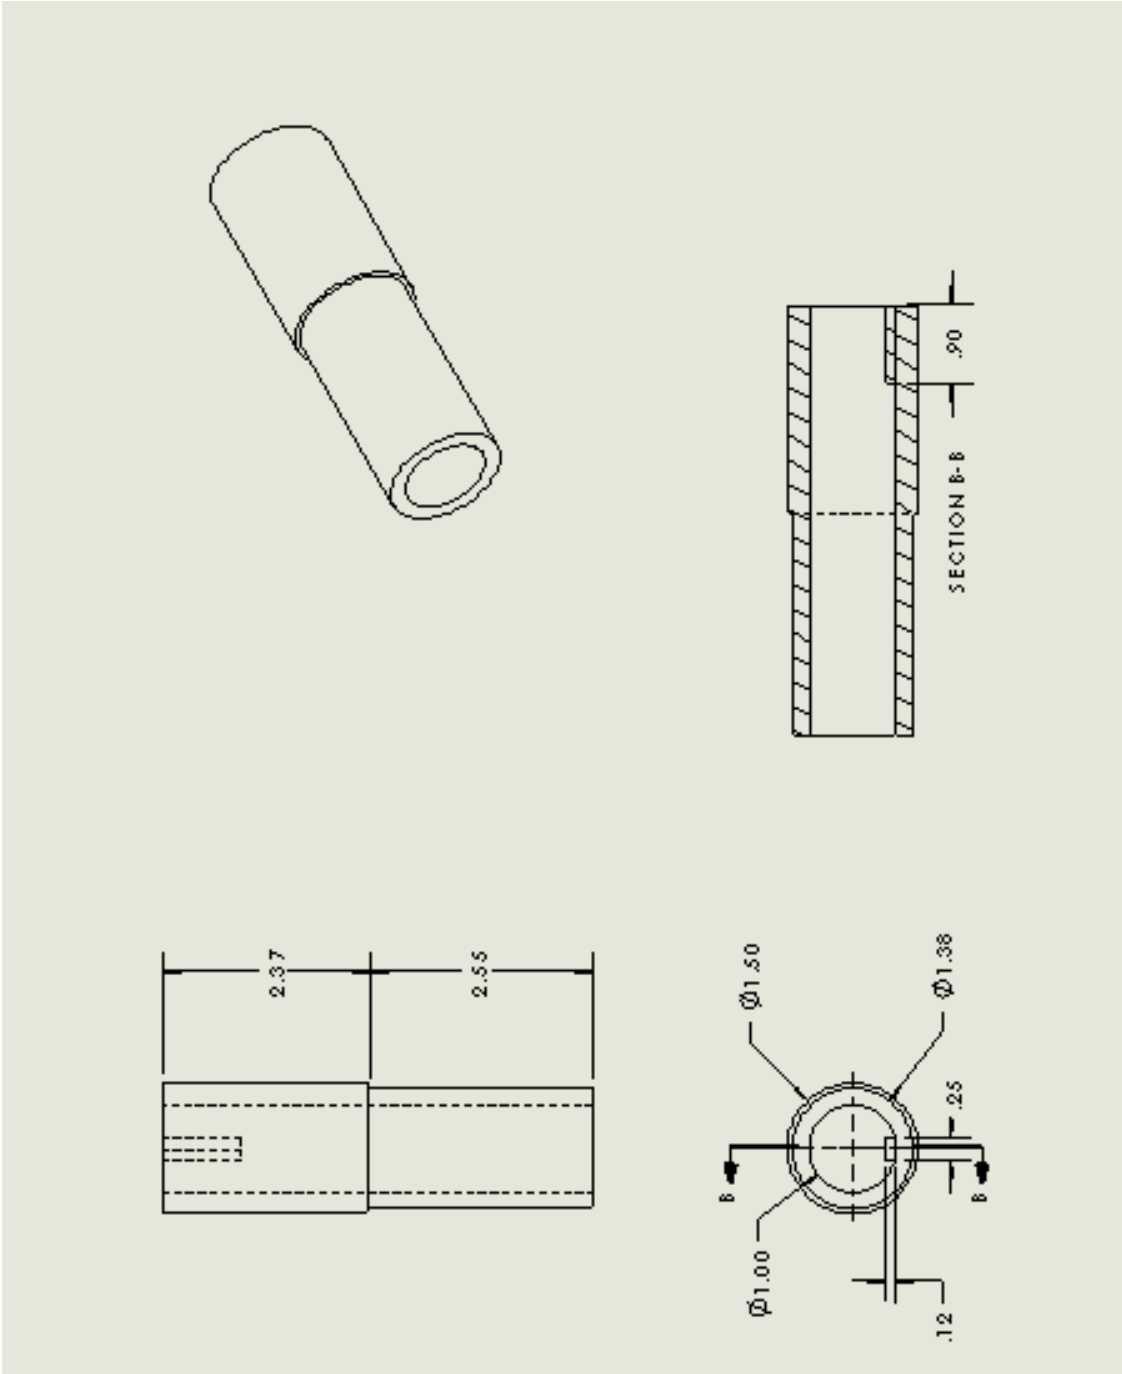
Drive shaft with key for turning blade shaft for the redesigned bearing carrier.
